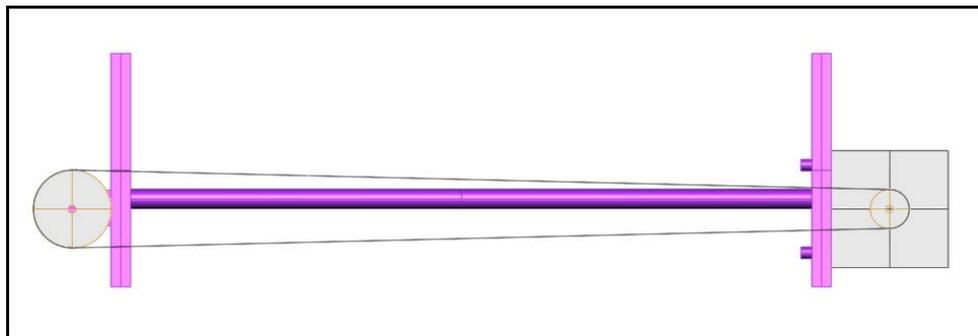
Front view of the printer carriage mechanism, showing the belt and pulleys
